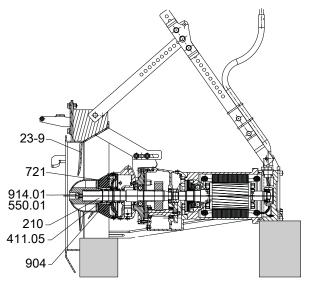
Mounting the axial propeller of an Amaline 500, 600
